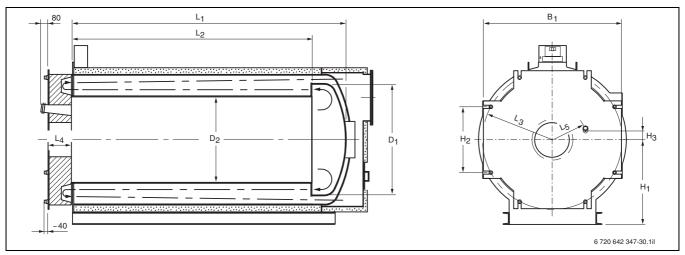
Combustion chamber dimensions Logano S825L, boiler sizes 6500 to 19200 (dim. in mm)
